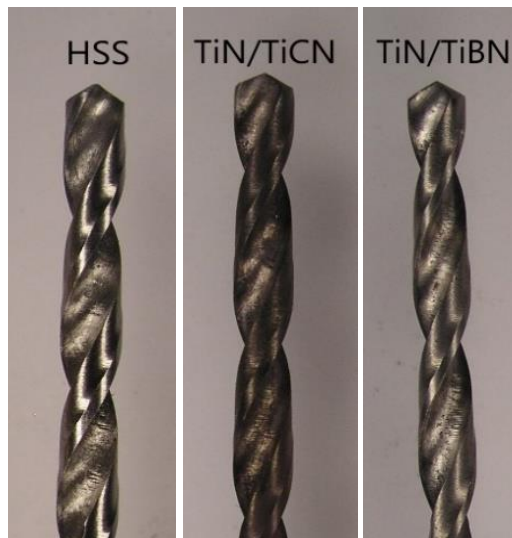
Appearance of a 4 mm diameter drill bit after 15 drilled holes in a 3 mm thick S355JR steel strip
